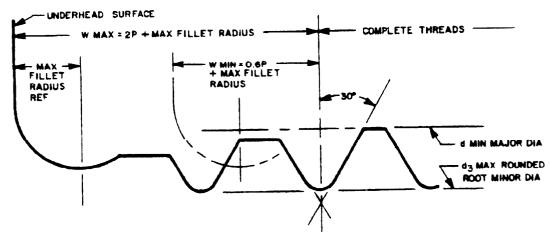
PITCH DIAMETER SHANK FASTENER - THREADED TO HEAD
